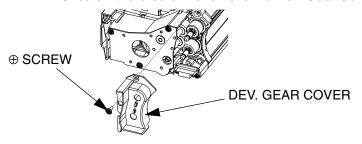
Removal of the Idler Gear (Z17/22) Assembly
